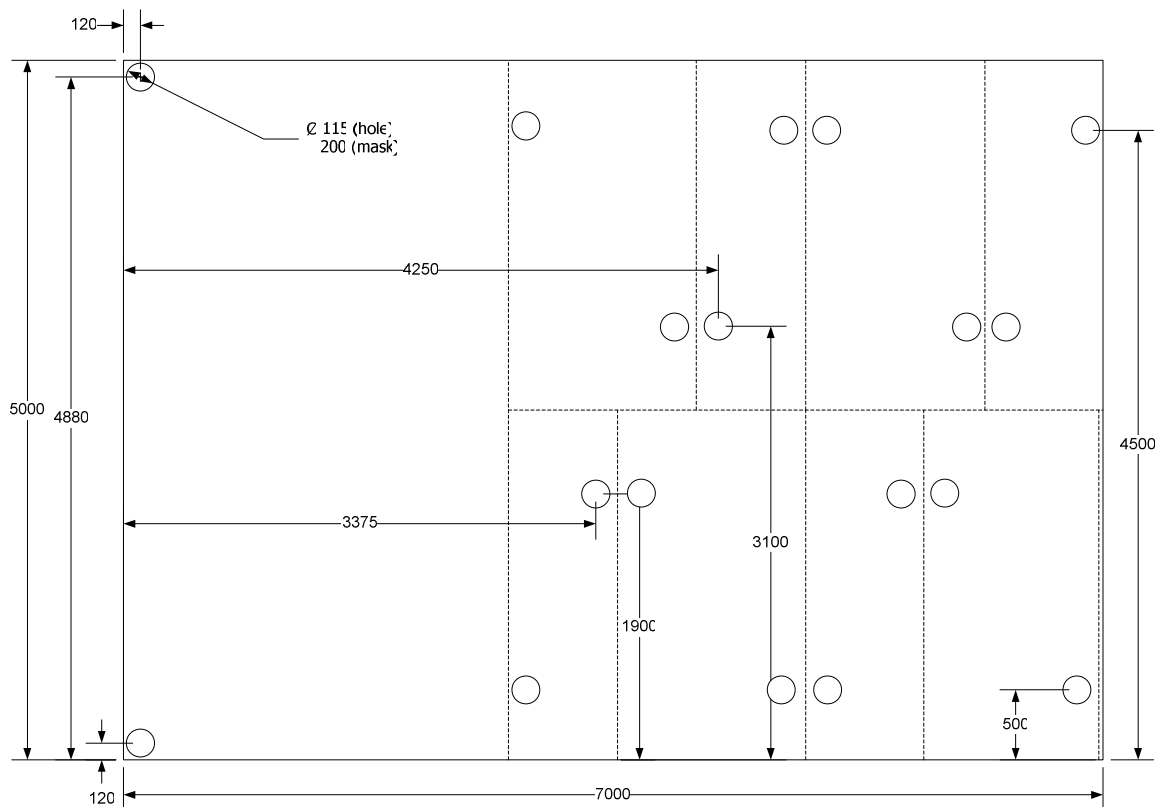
MDK-MB PCB Outline and Mounting Hole Locations (Top View, mils)
